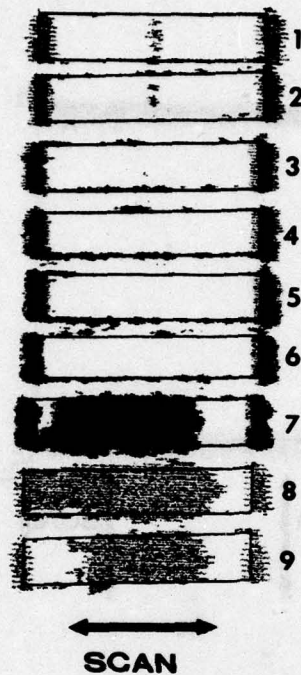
C-scan Recording of 45 MHz, 18° Surface Wave Inspection of Tensile Surfaces of NC-203A HPSiC Four-Point-Bend Specimens.
